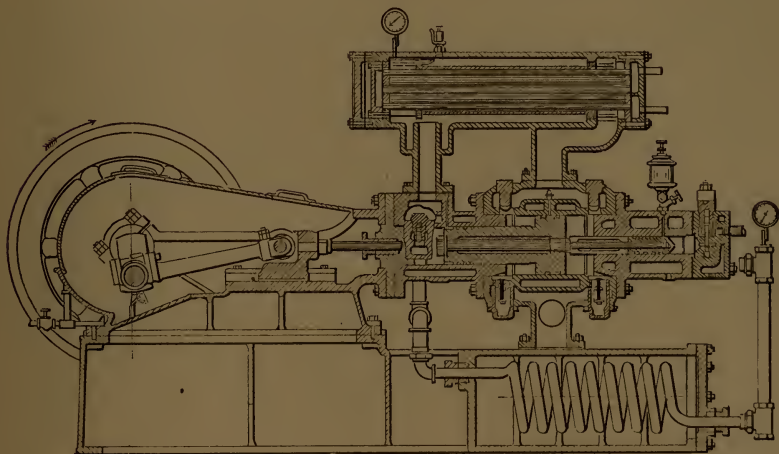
Section of Three-stage Belt Driven Compressor.
